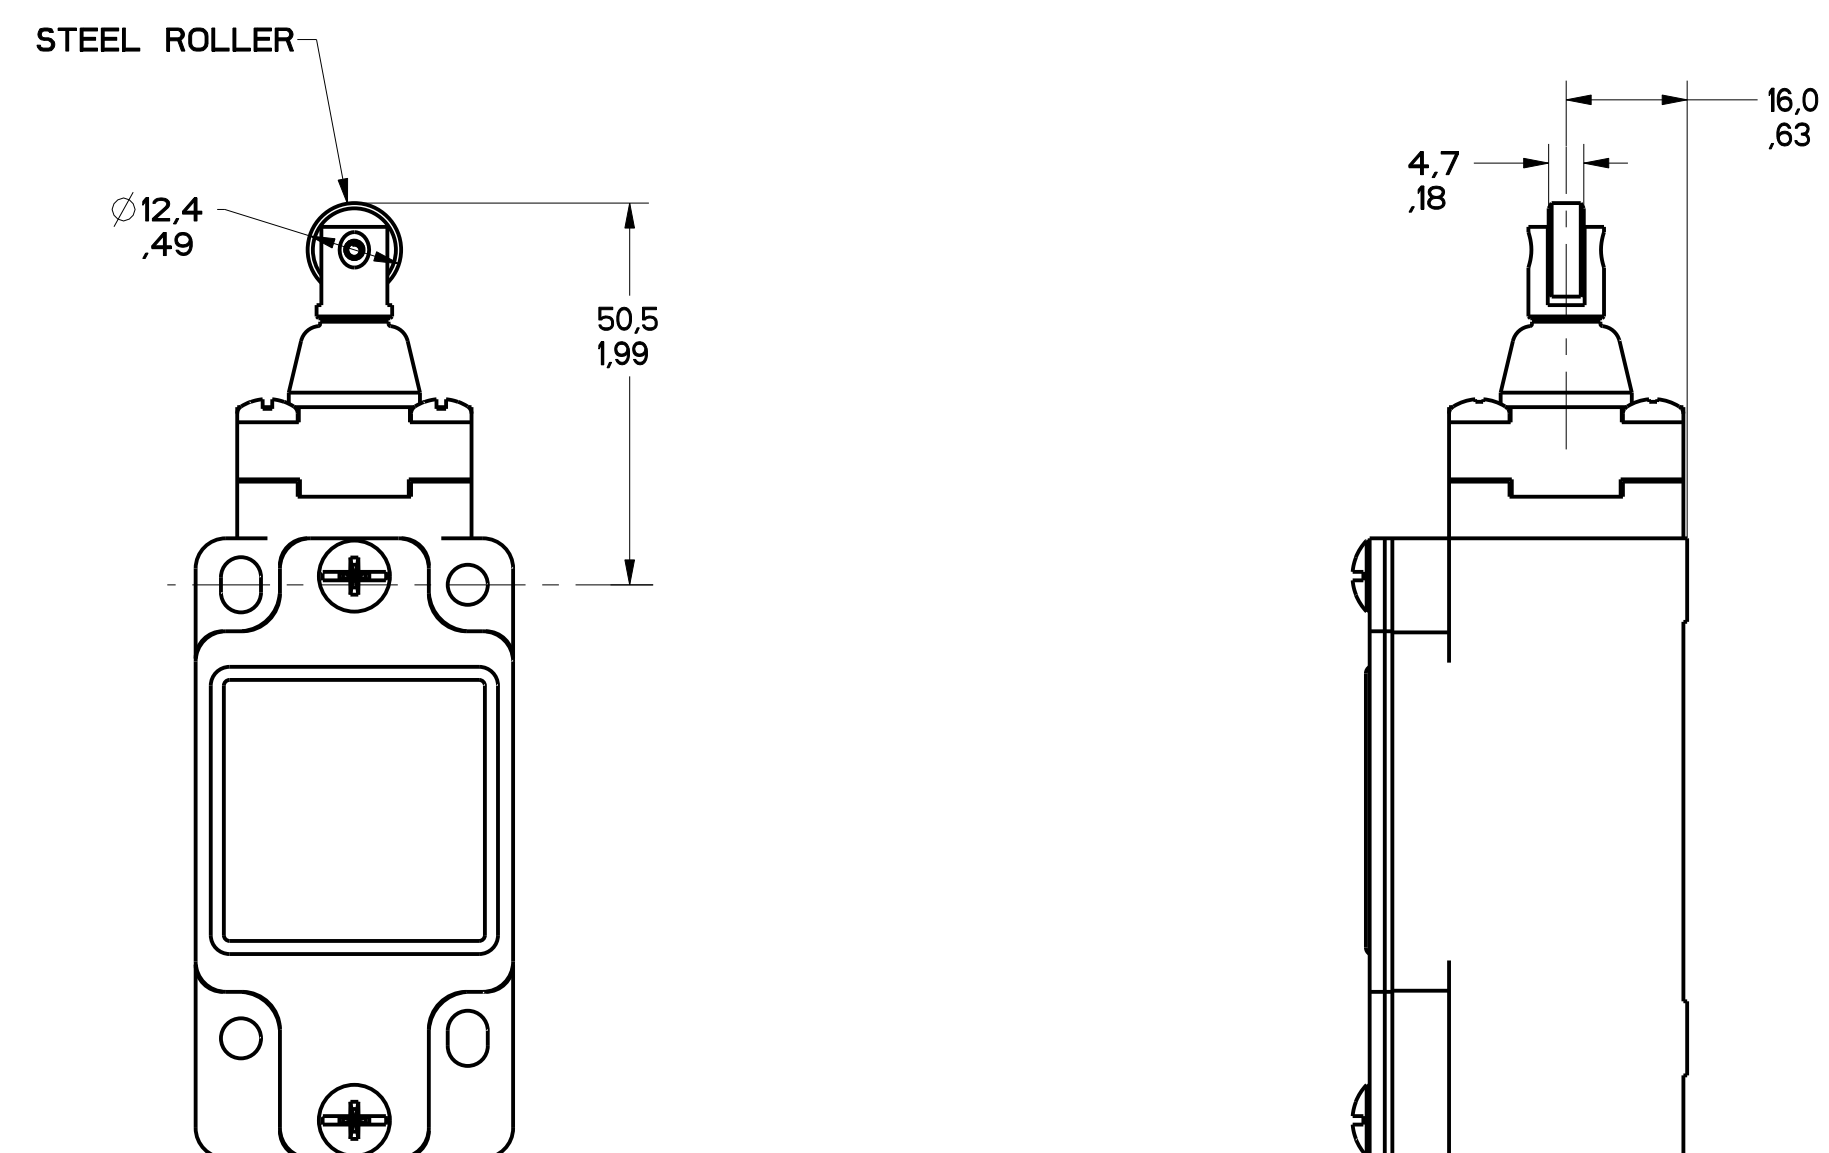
TOP ROLLER PLUNGER HEAD
